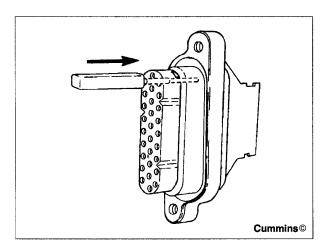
Make Sure Tool is Pushed to Bottom of Cavity
